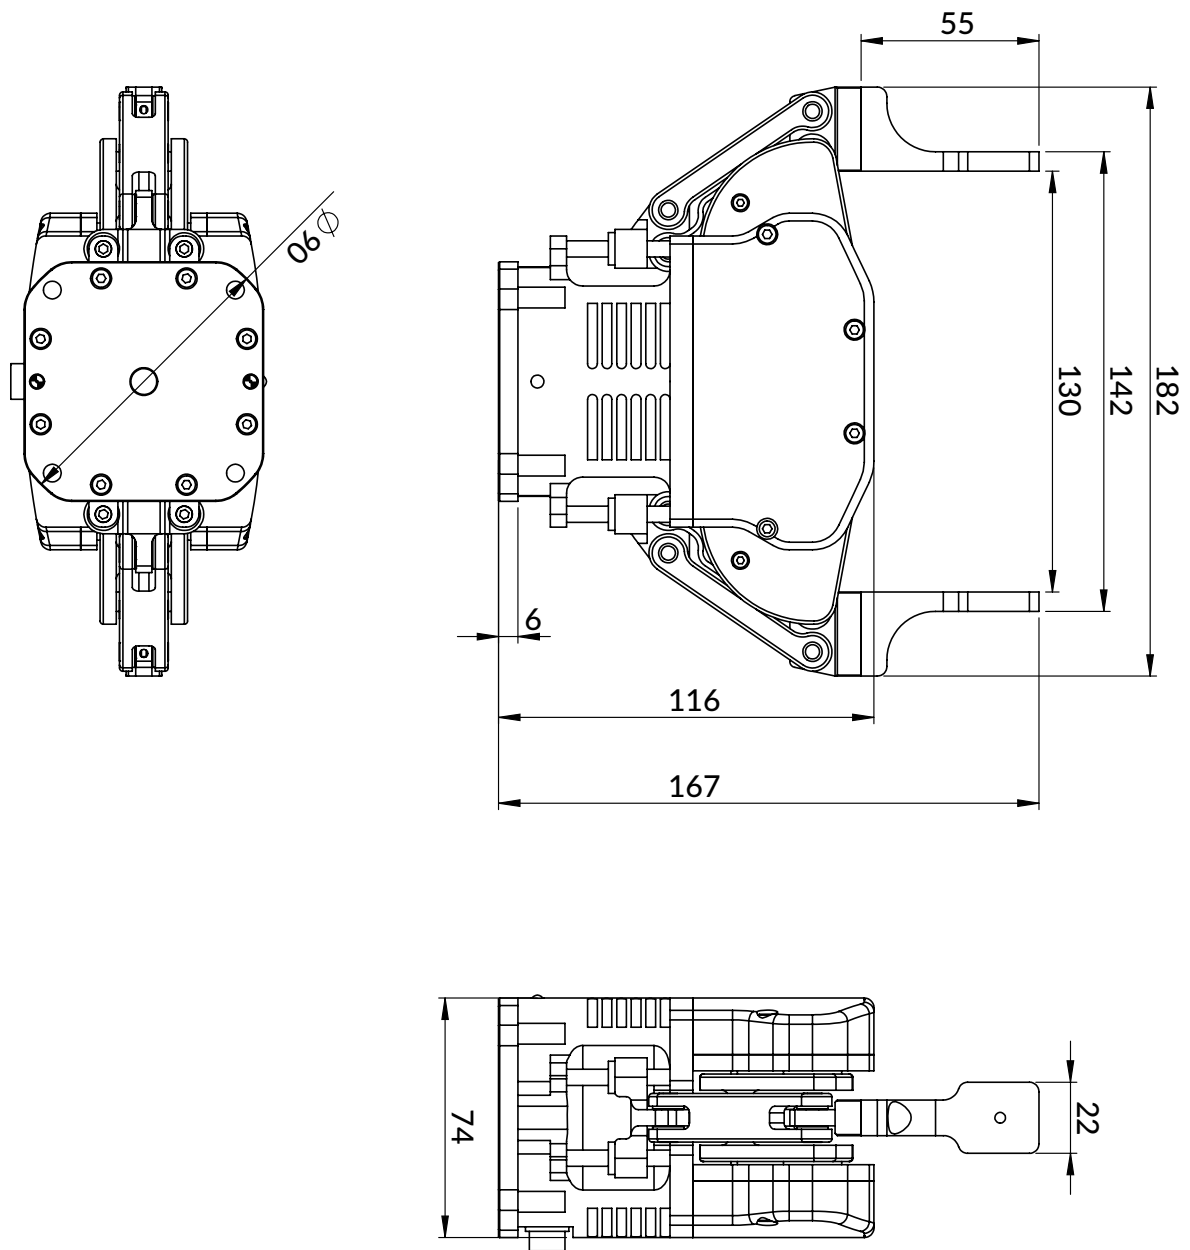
SusGrip 2F Mechanical Dimensions (Opening, Rotated)
